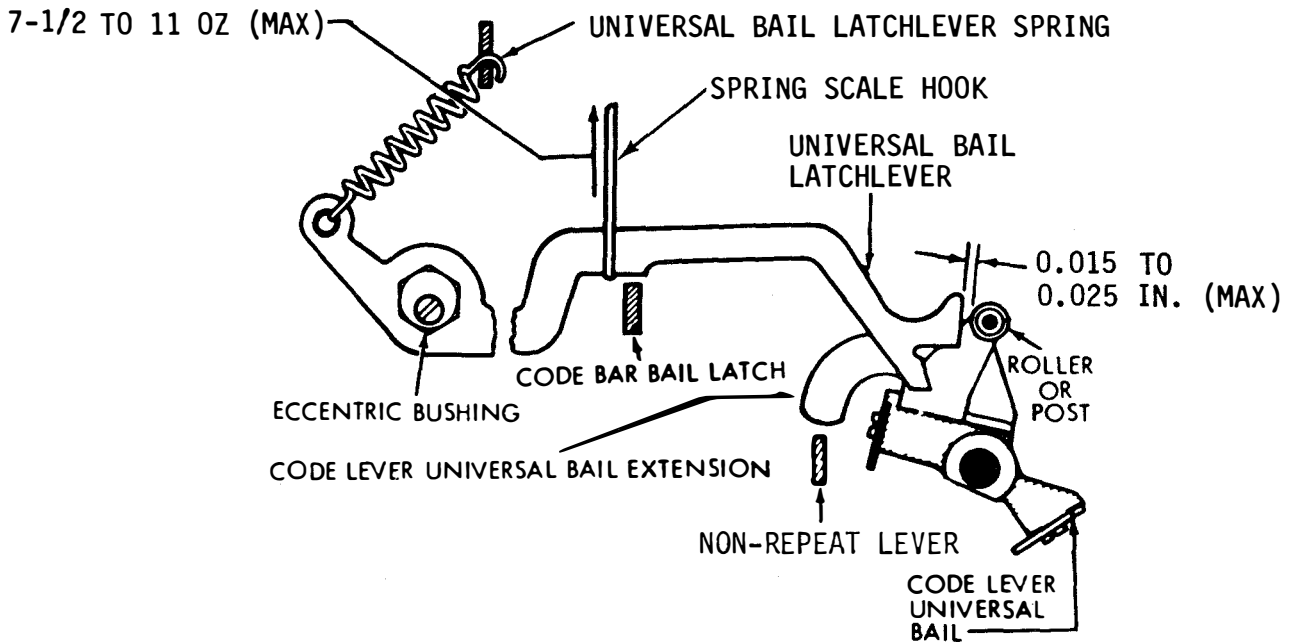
Universal Bail Latchlever (Preliminary) and Latchlever Spring
